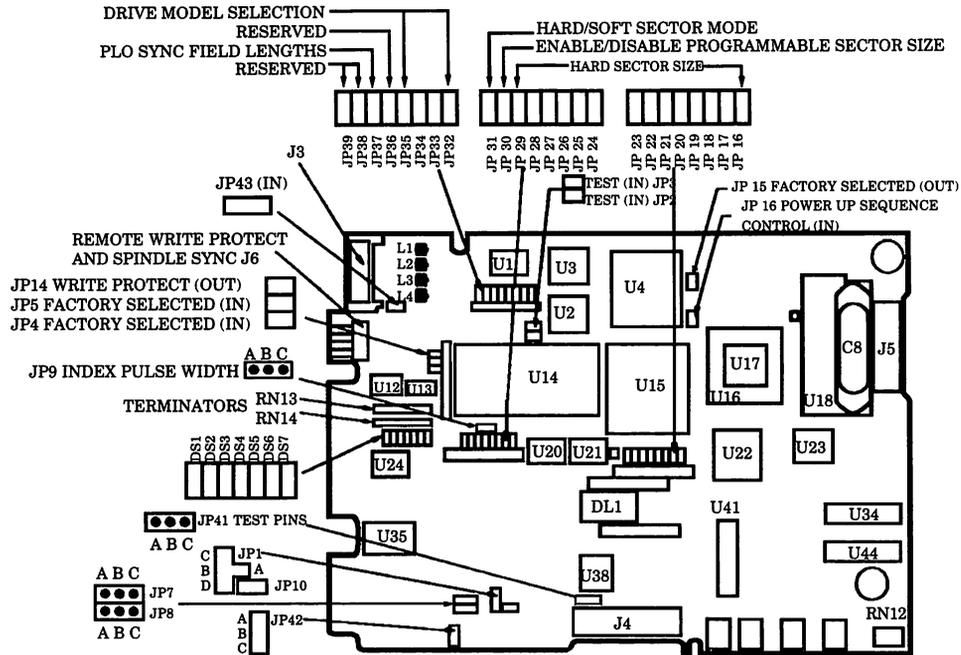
Drive Jumper Options (PCB P/N 1015468)
